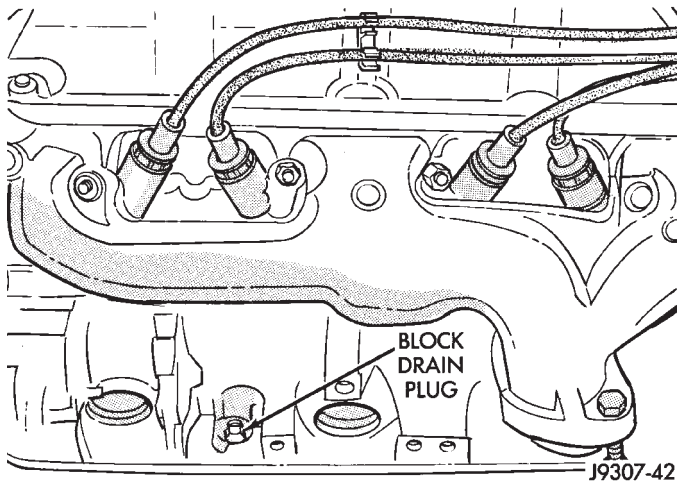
Drain Plugs—5.2/5.9L V-8 Engines
